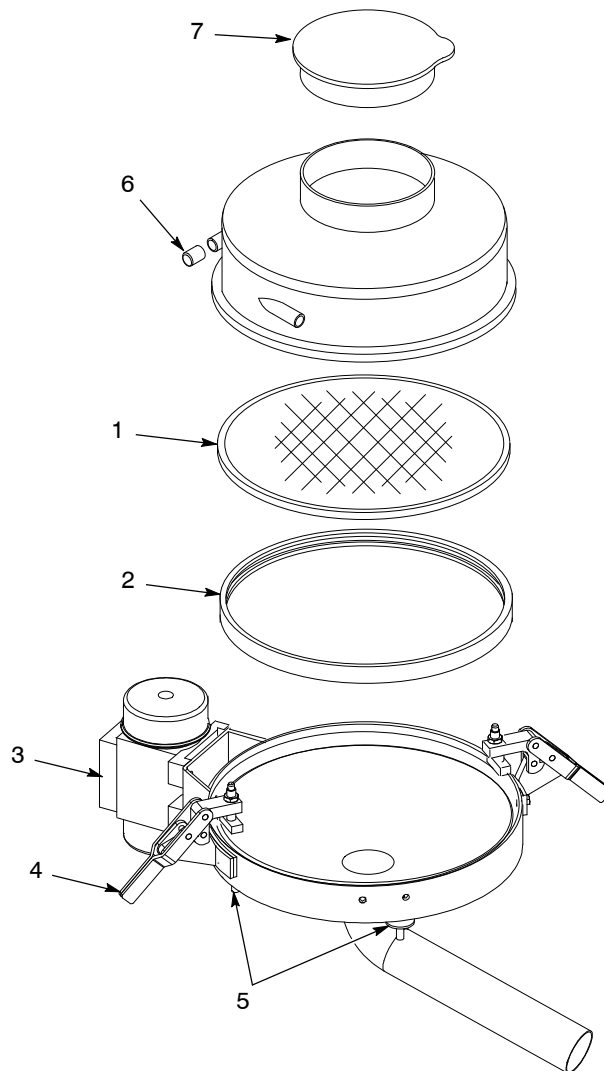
Sieve Parts (Sieve with Angled Chute Shown)
